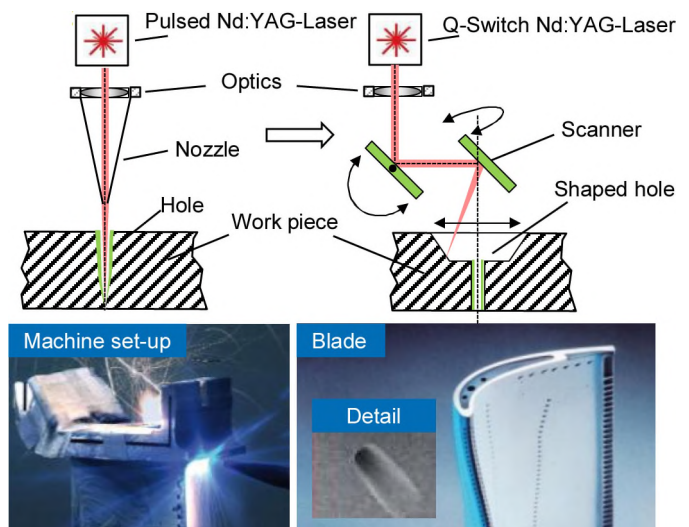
Principle for process combination of cylindrical drilling and shape hole drilling in one machine set-up and example of high pressure turbine blade with shaped holes. Based on [25,159].
